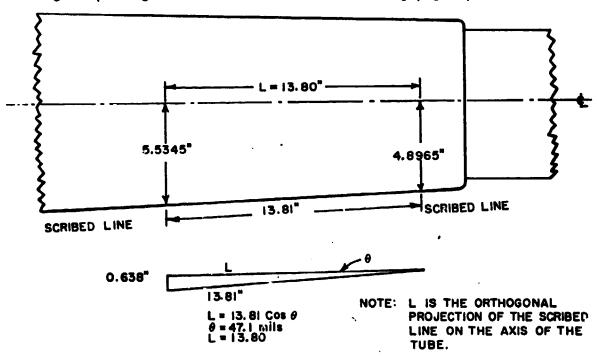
Section of Jacket, 155-mm Howitzer Tube M185.
